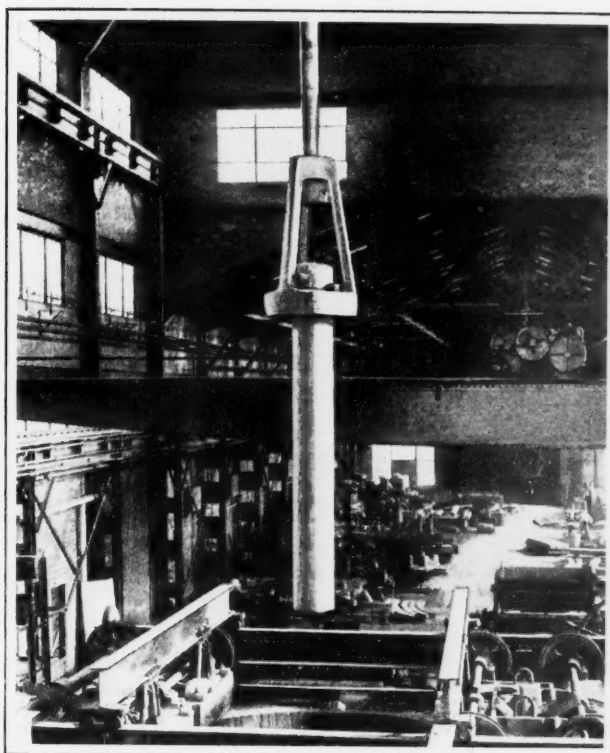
Lowering a Gun Barrel Casting into the Gas Furnace for Heat-treatment
